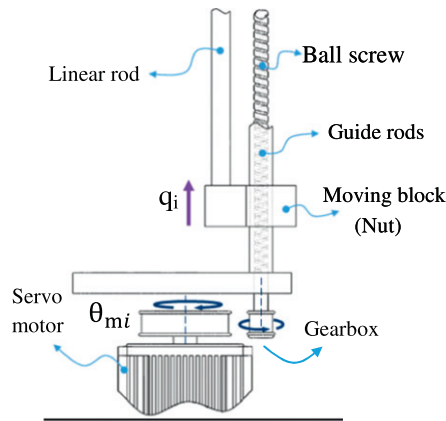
The  $i$ th motor, ball screw and nut assembly.
